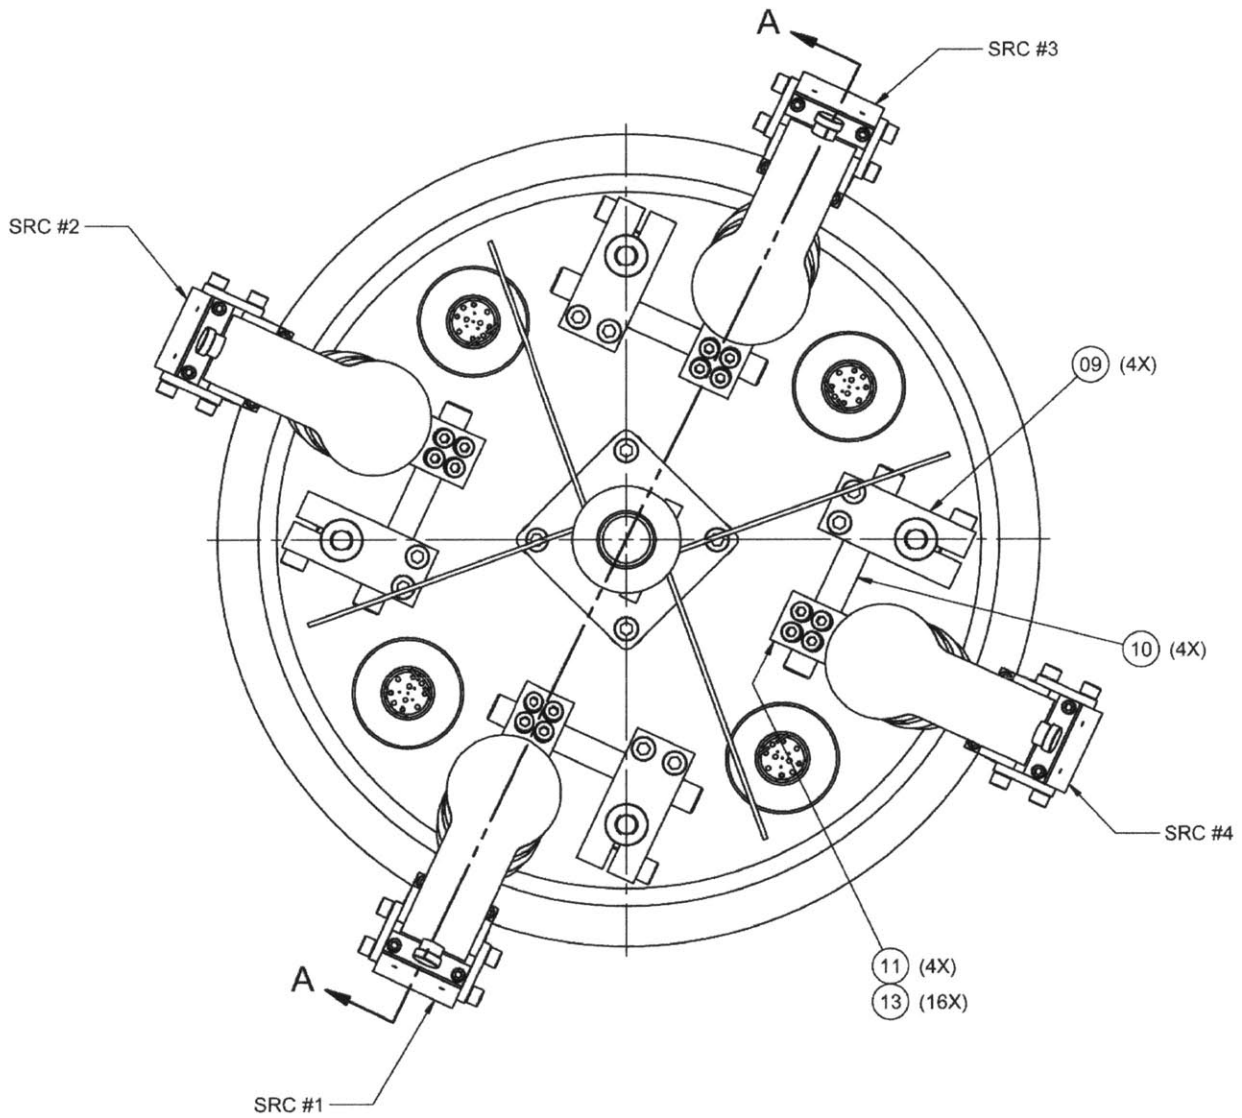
Engineering drawings for oCVD reactor bottom flange with evaporation sources—top view.
